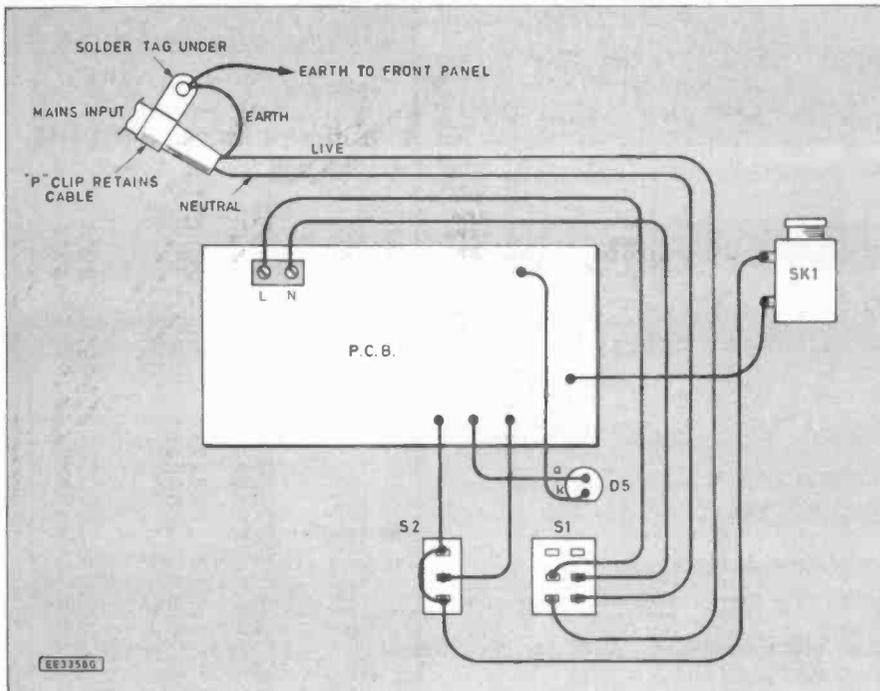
Interwiring, the front and rear aluminium panels must be earthed.
